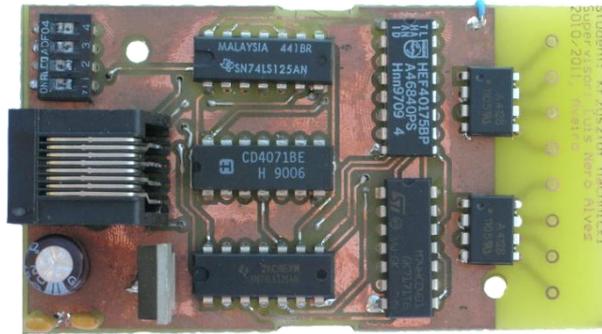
EXTENSION BOARD’S PHOTOGRAPH.
